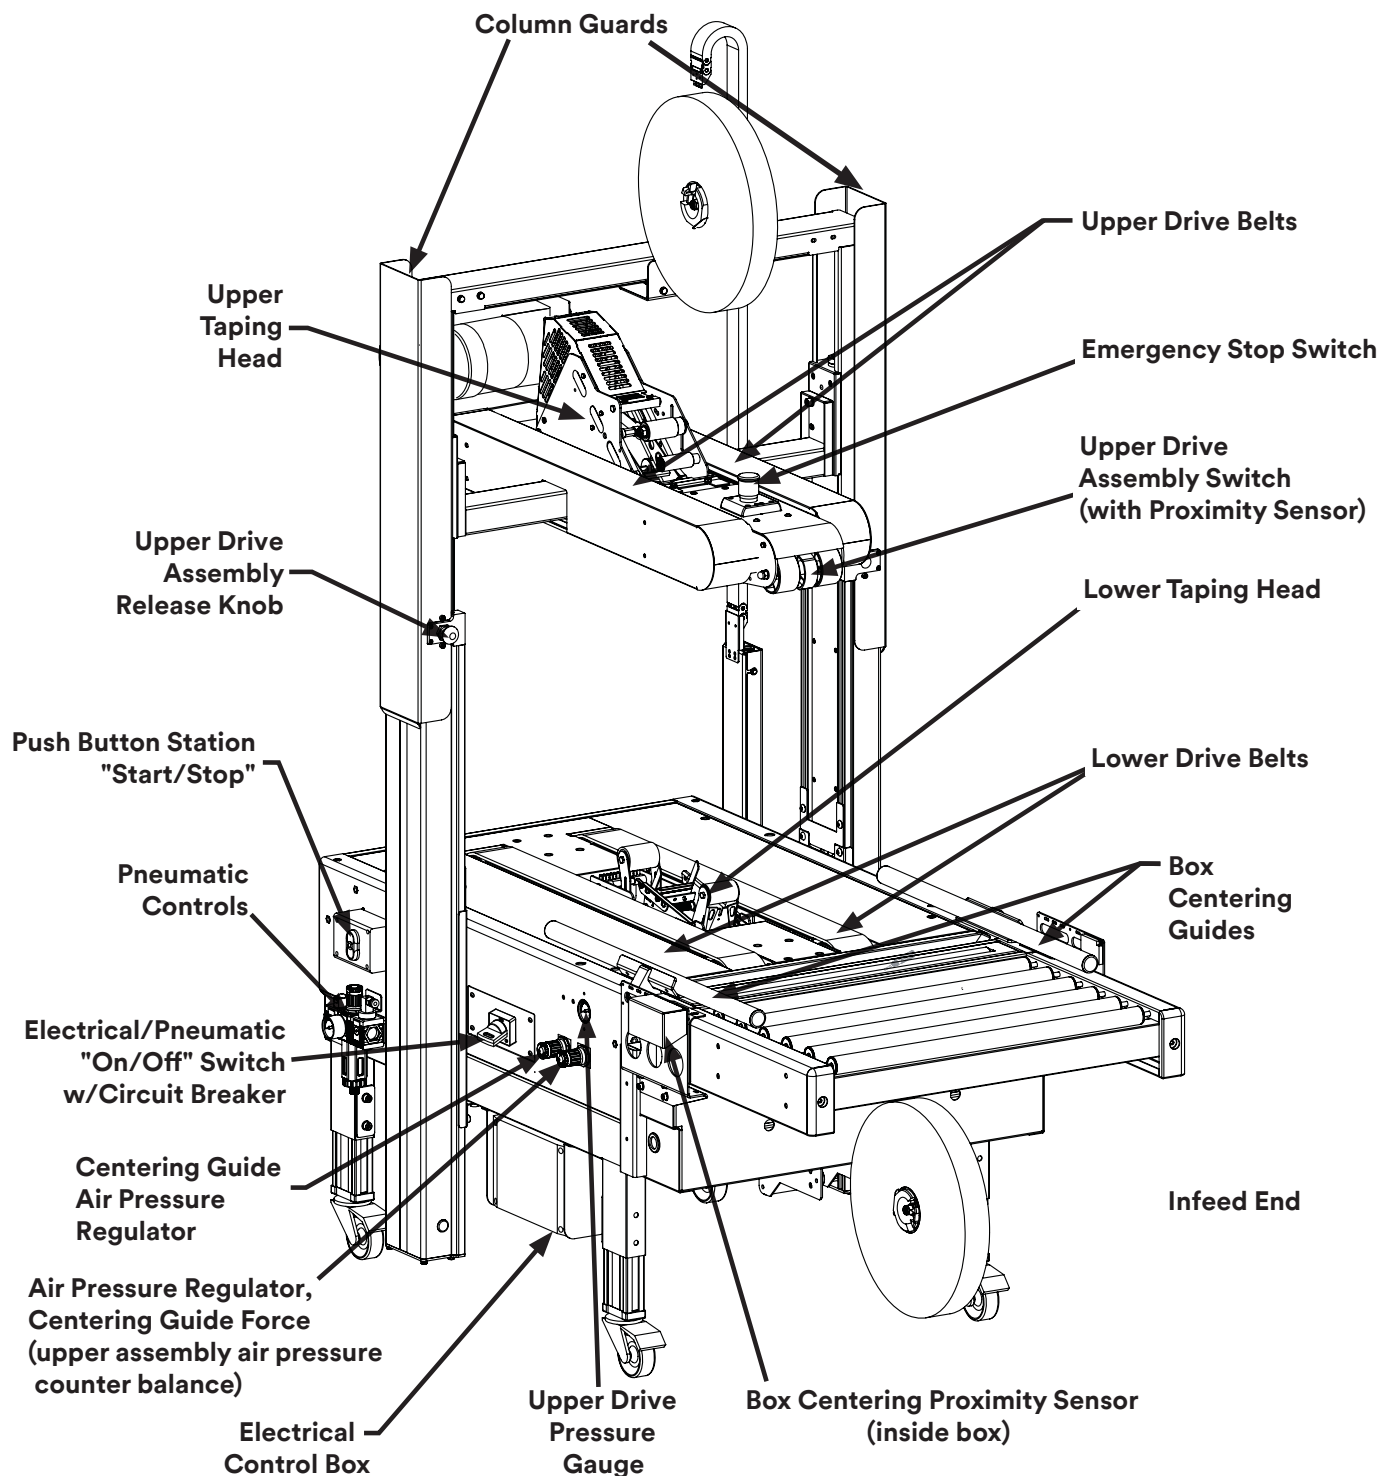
7000r-7000r3 Pro Case Sealer Components (Left Front View)
